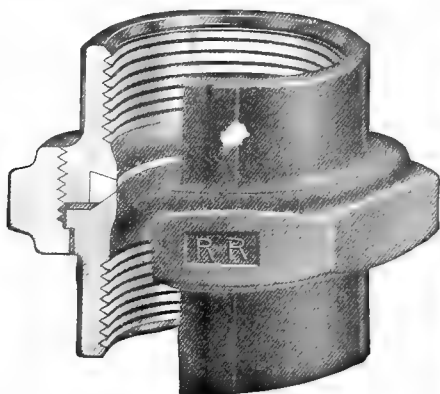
Crane Union with Inside Thread. The Crane Company.
